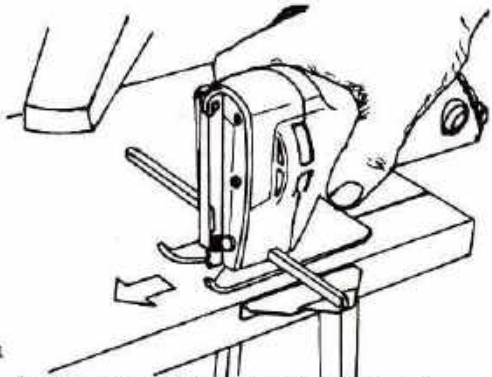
RIPPING A BOARD WITH THE JIG SAW AND GUIDE
